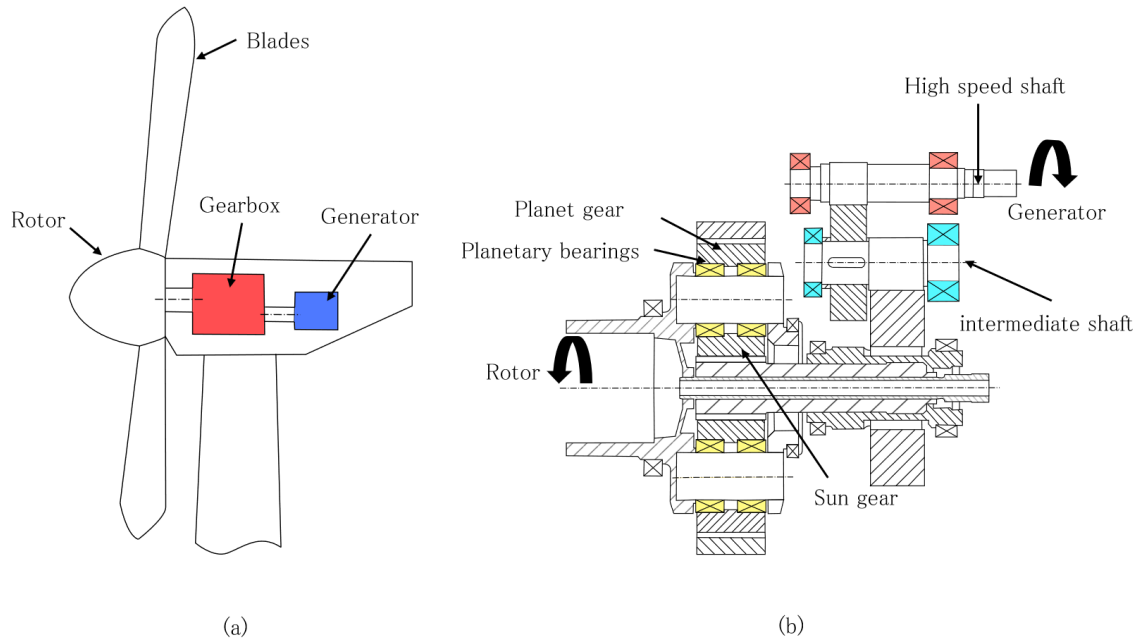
(a) Wind turbine components and (b) gearbox with a single epicyclic gear stage [1].
